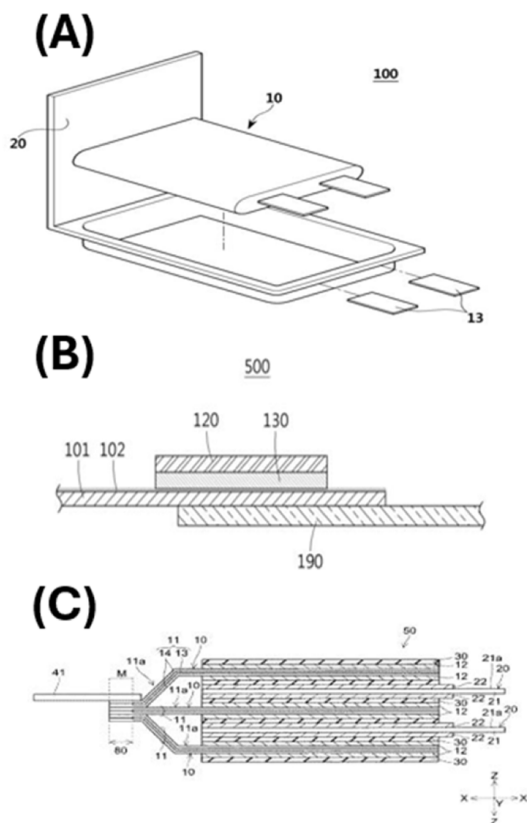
Patent drawings about (A) tab extension and tabless current collector design³⁷⁾, (B) direct welding of tab onto polymer layer³⁸⁾, and (C) welding of tab onto metal layer in current collector³⁹⁾.
